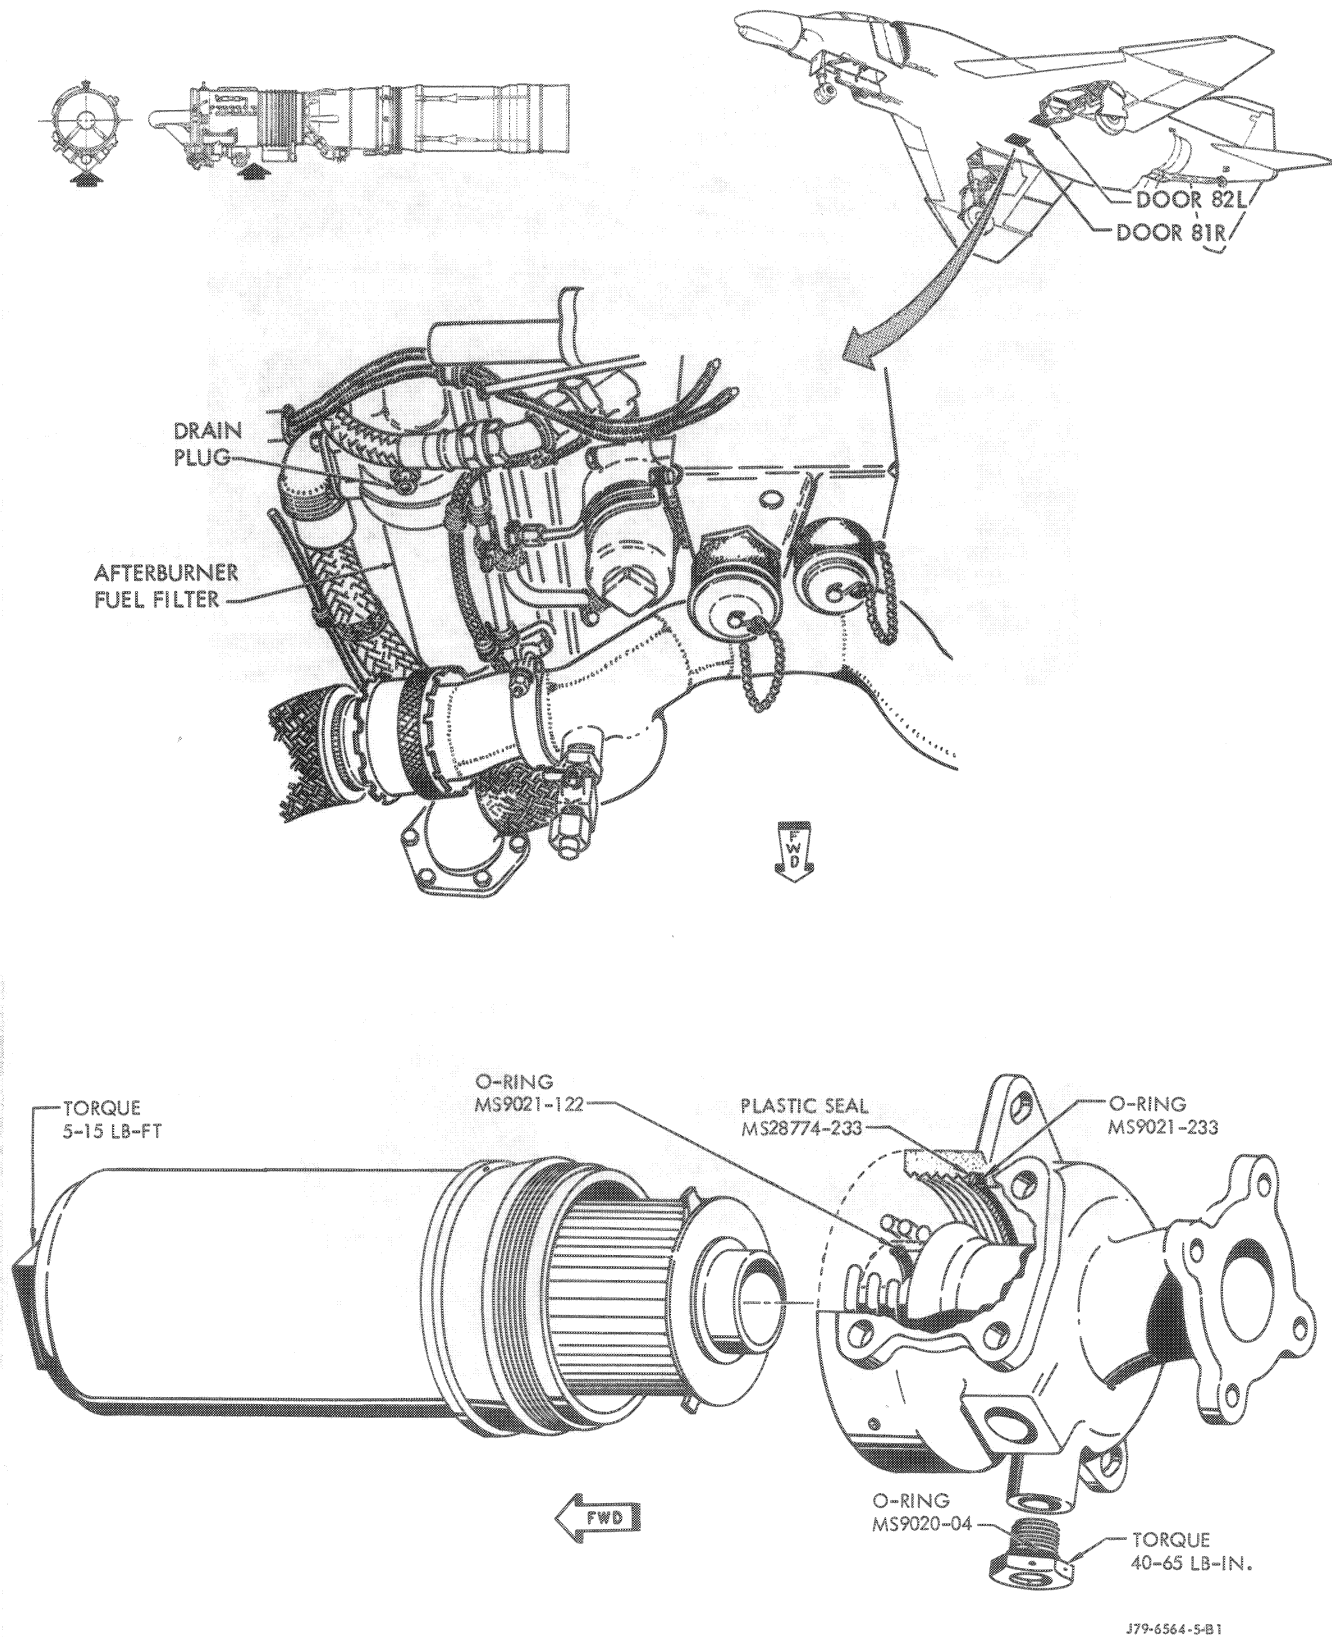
Afterburner Fuel Filter Removal and Installation
